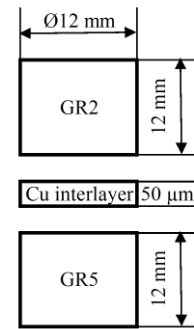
Schematic illustration of the sample prepared for the diffusion welding
